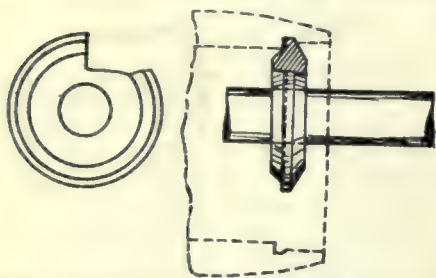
CUTTER USED FOR RECESSING NOSE BEFORE THREADING.
